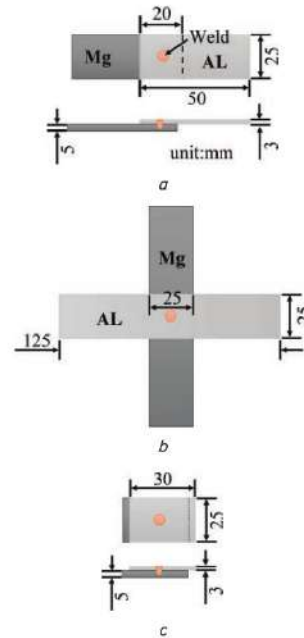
Dimensions of the specimen for testing: *a* – shear load; *b* – cross tensile load; *c* – metallography
